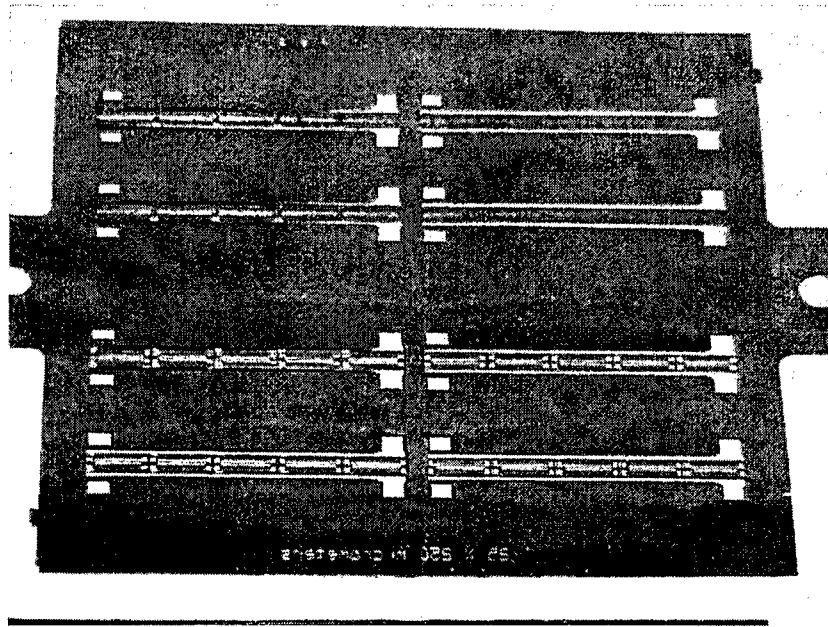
Typical Foil Used in Fabrication of Perpendicular μ Heat Exchange Test Specimens
